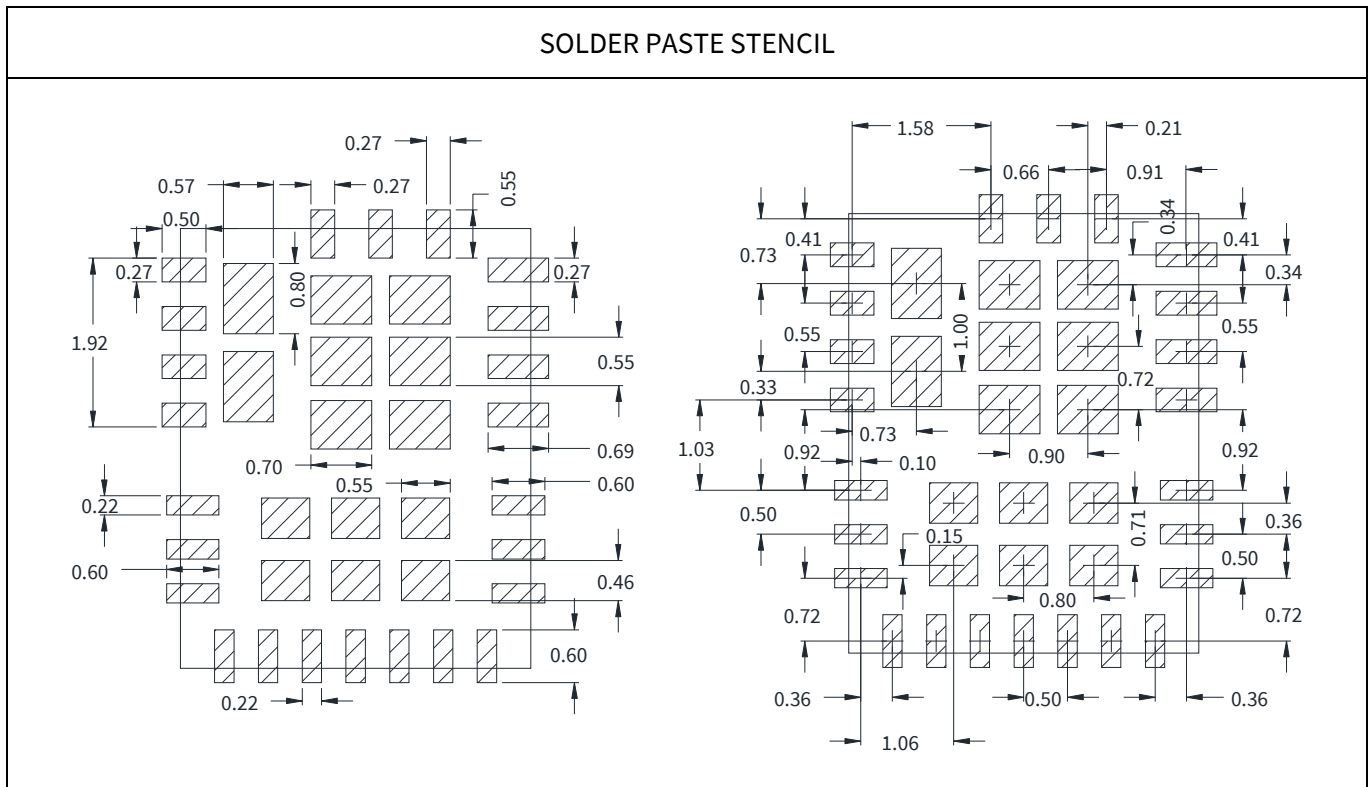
Stencil pad size and spacing (all dimensions in mm)
